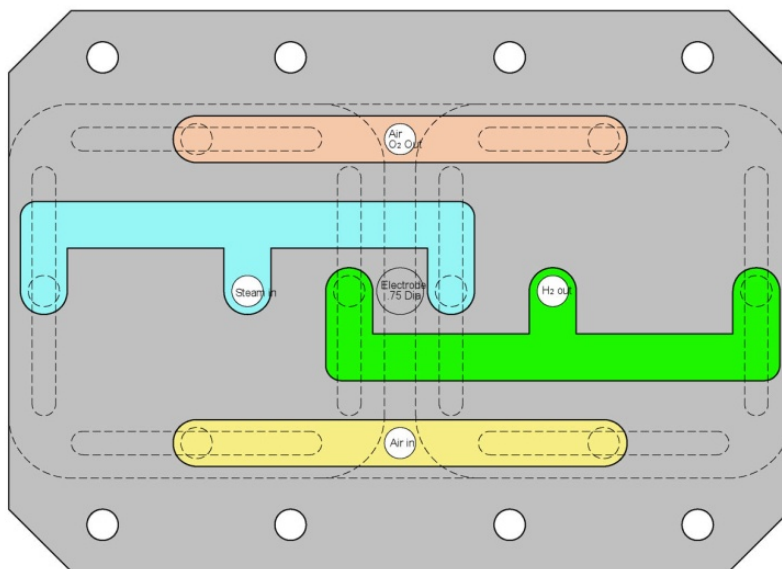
Base manifold/current collector plate for 4-kW testing.
